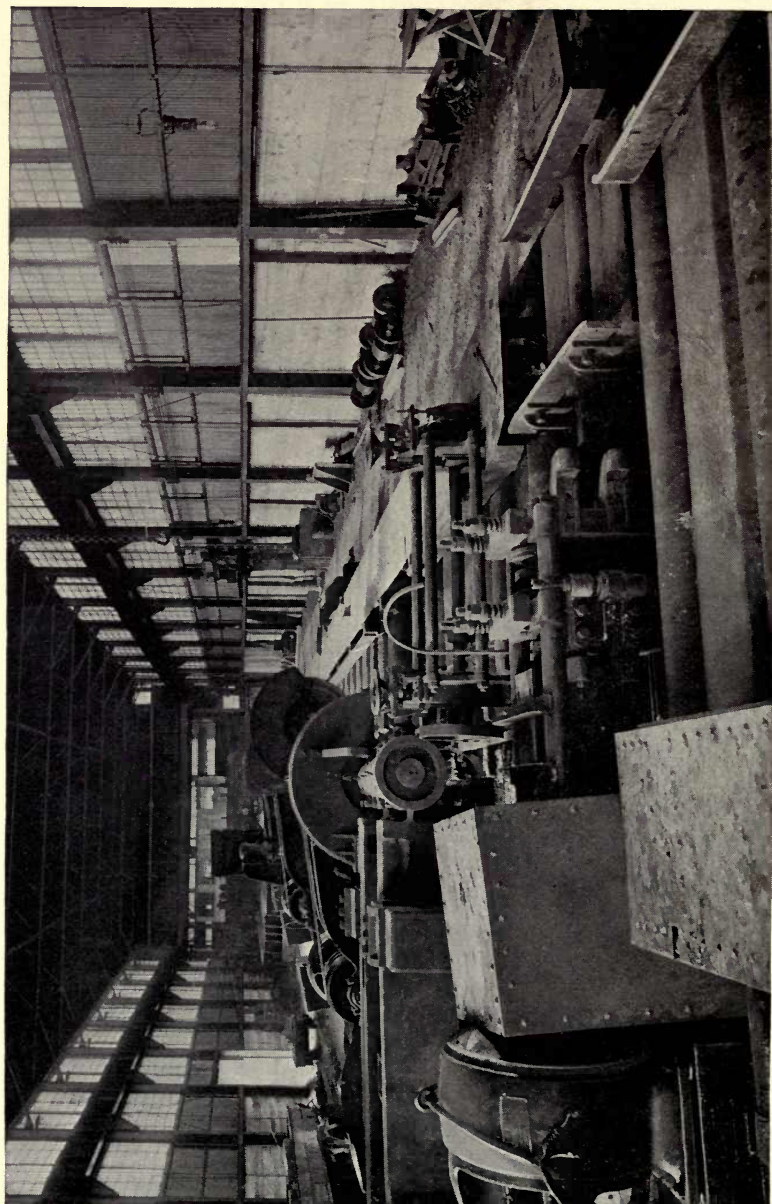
Rail Cambering Machine, Bethlehem Steel Co., South Bethlehem, Pa.
